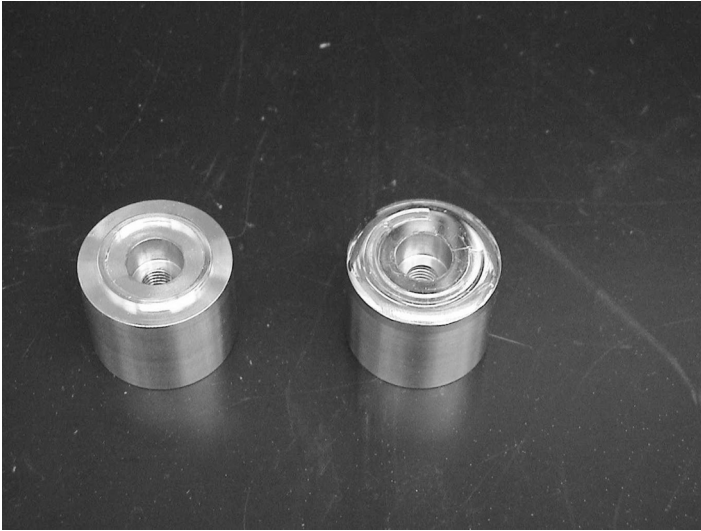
Failure surfaces of gold-plated napkin-ring samples.
